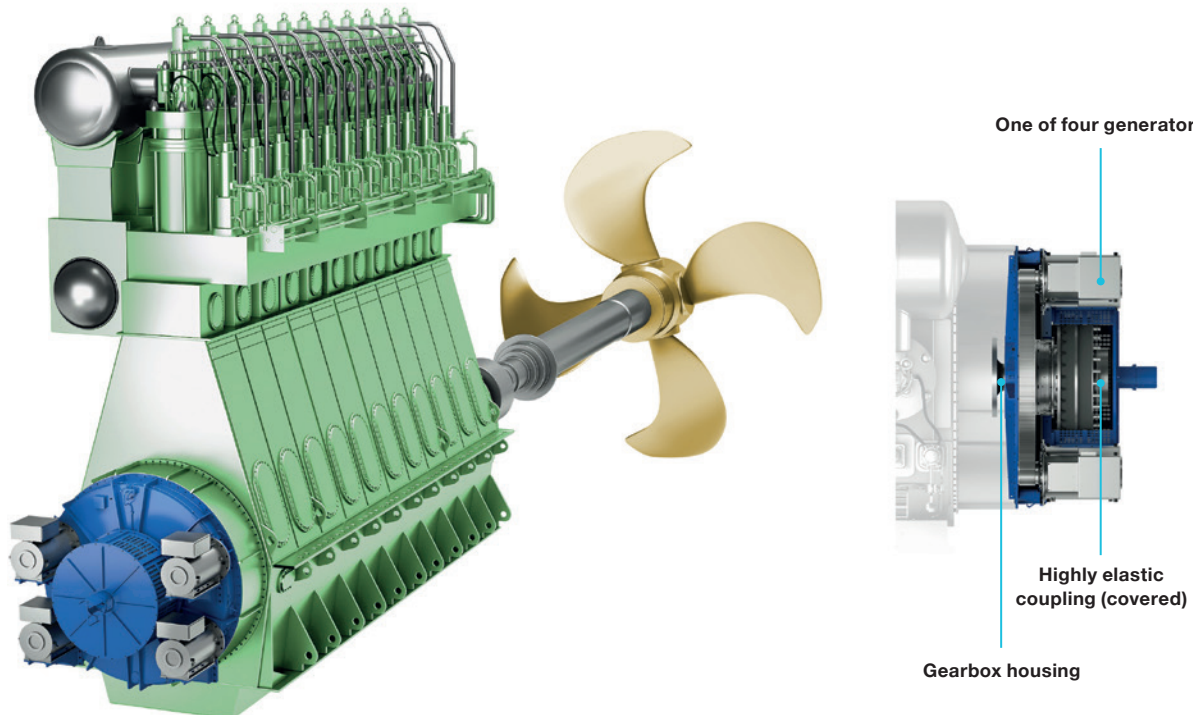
Left: The RENK/MAN-ES IFPS generator mounted on the frontend of a MAN ES two-stroke marine engine. Right: a cross-section view of the IFPS showing generator, coupling and gearbox housing.
